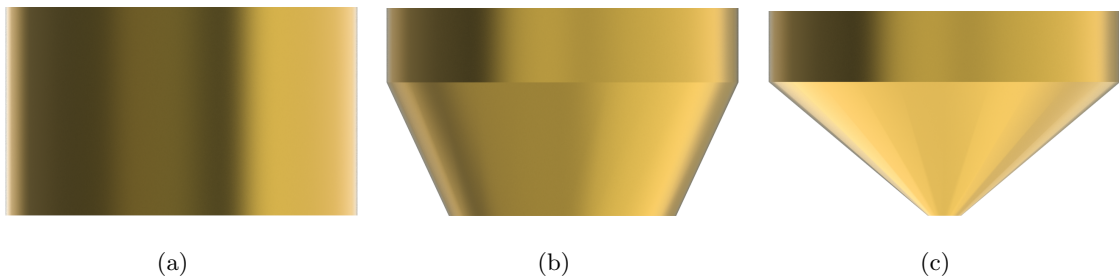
Probe geometries for the shear layer modification experiments. Probe geometry 1 with 0° taper (a), probe geometry 2 with 25° taper (b) and probe geometry 3 with 50° taper (c).
